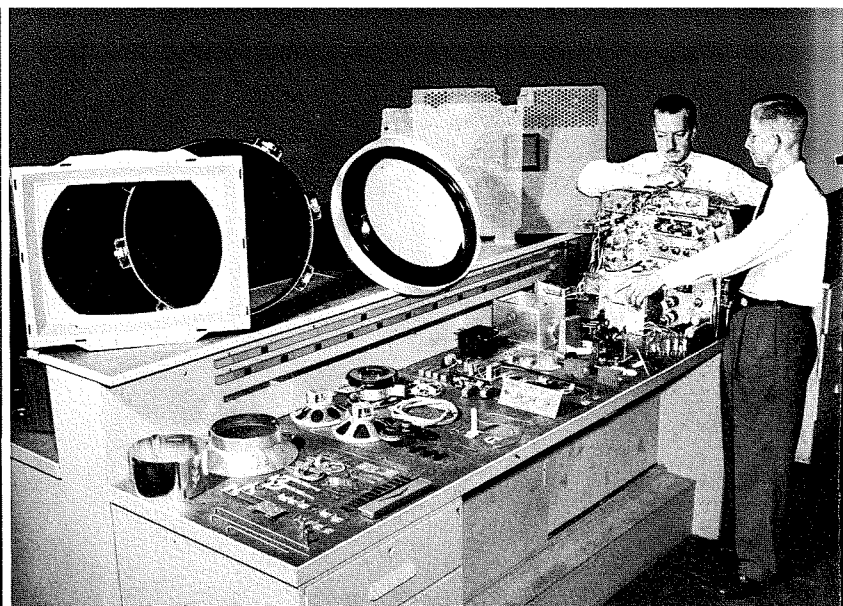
Mechanical design and assembly of a color receiver involves many components requiring special attention, such as the high-voltage assembly, deflection yoke assembly, and color equalizer. Ernie Dawson (at far right) and Jack du Bois, mechanical engineers at Cherry Hill, N. J., have grouped together a typical instrument assembly for purposes of illustration.
